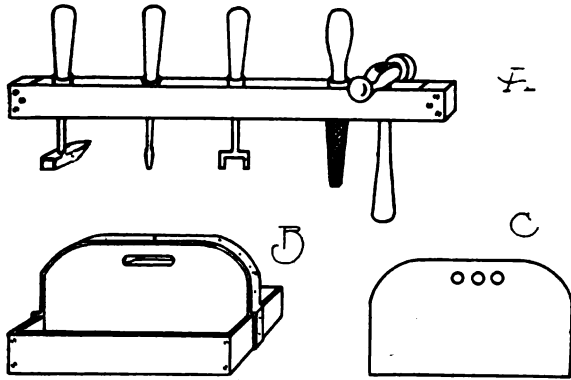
A, Simple Tool Holder; B, Easily Constructed Tool Box.
